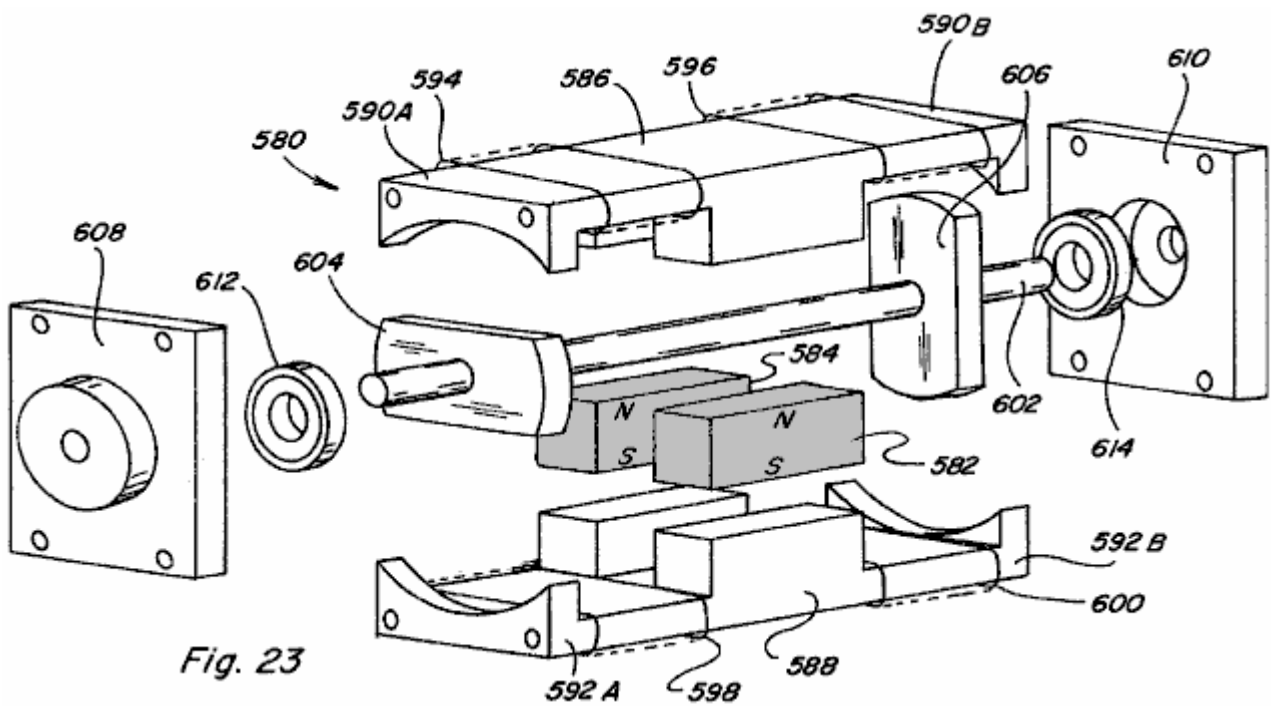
is an exploded perspective view of another embodiment of a rotary motion device;
